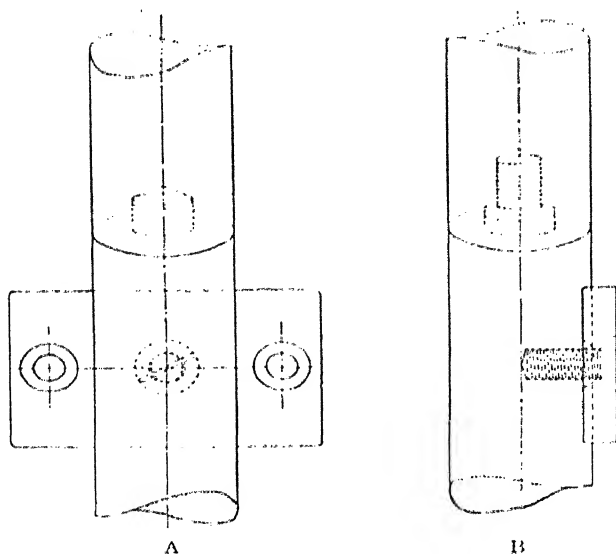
Details of joints in round steel guide rails. A, Spigot and socket plain. B, Spigot and socket screwed.
